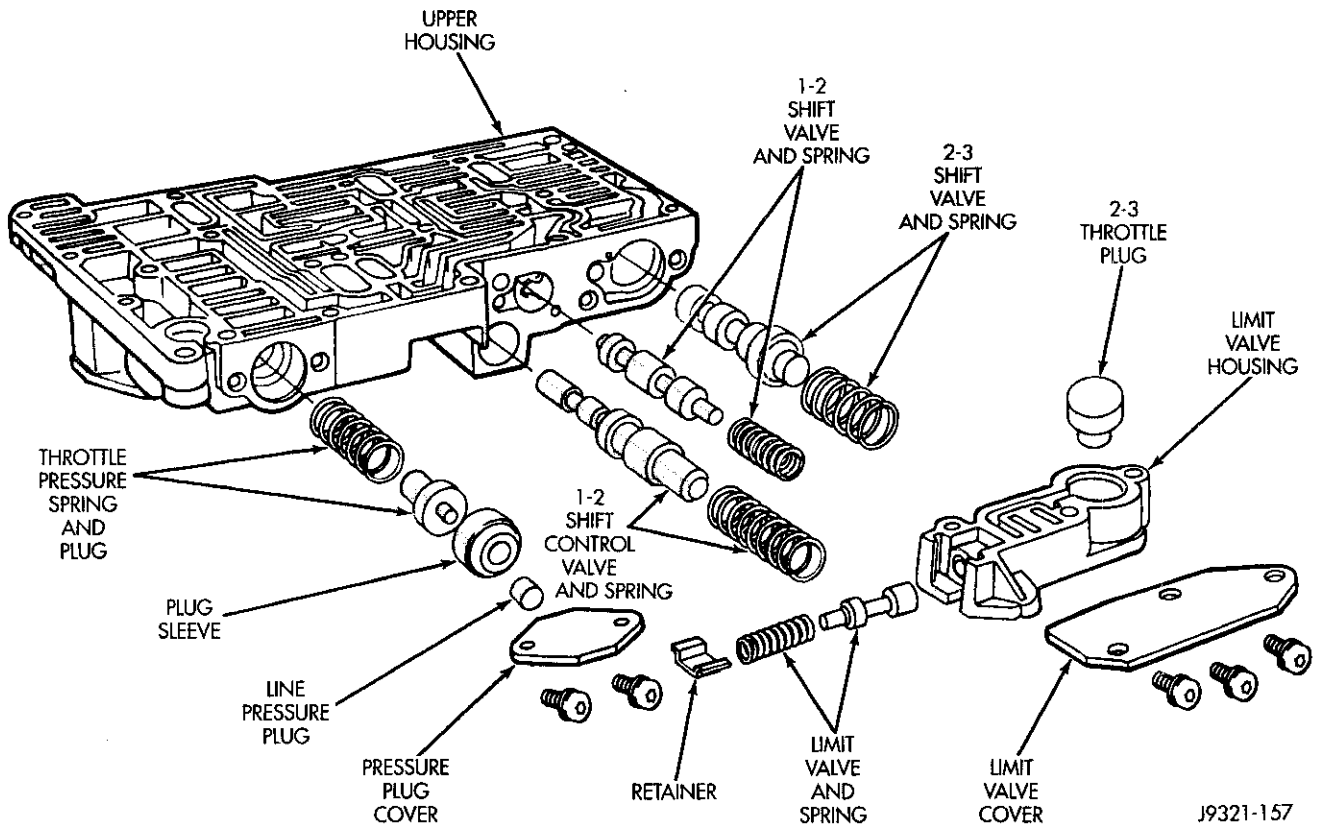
Upper Housing Shift Valve And Pressure Plug Locations
